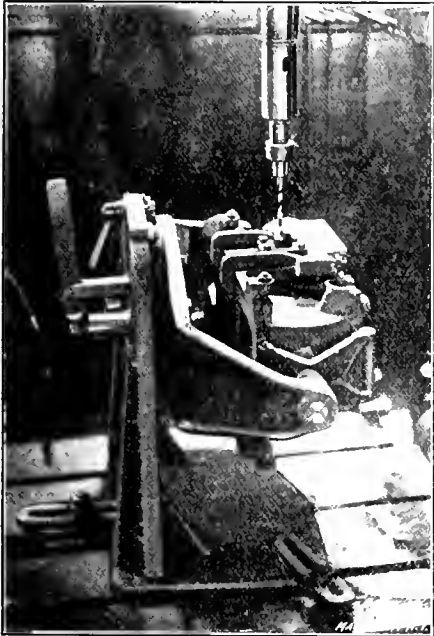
Drilling, Reaming and Tapping Fixture for Small One-piece Bed and Cylinder
